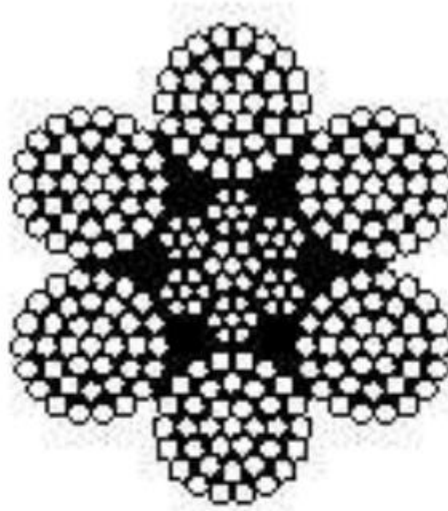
Typical cross-section of a steel core class 6x37 wire (American Petroleum Institute, 2011).
